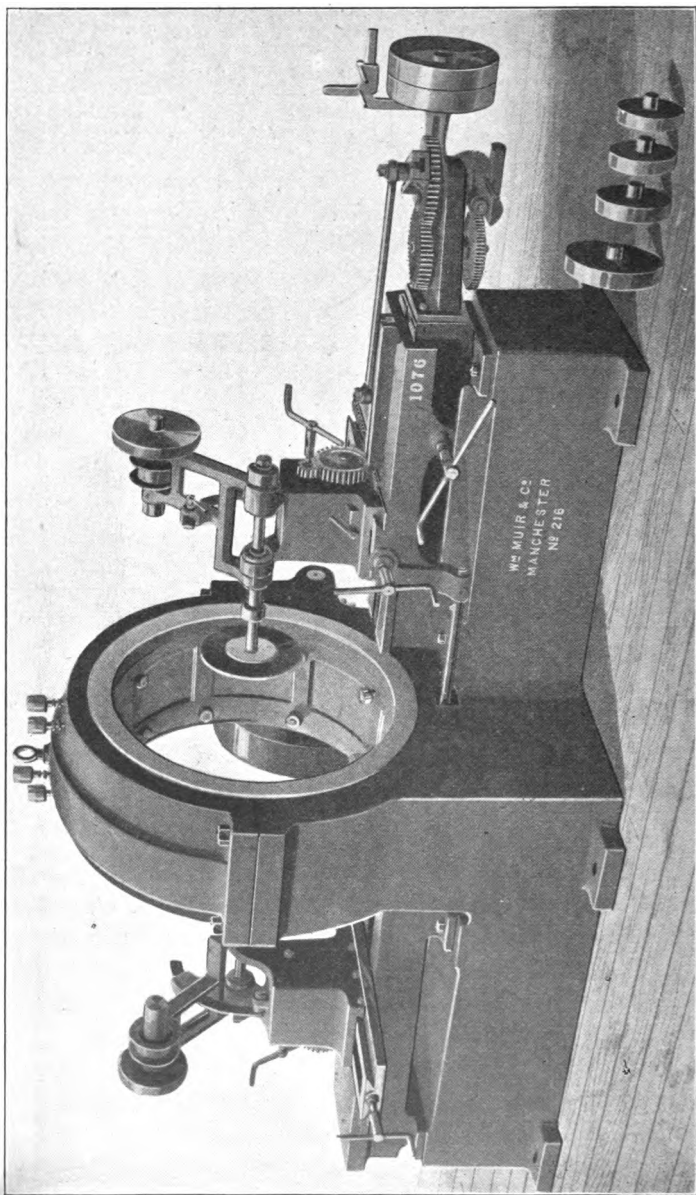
Machine for Grinding internally Chilled Steel Rolls.
